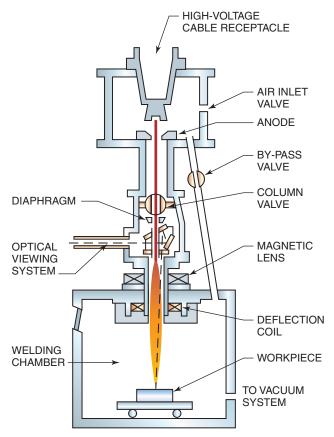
7.5-kW electron beam welder.
